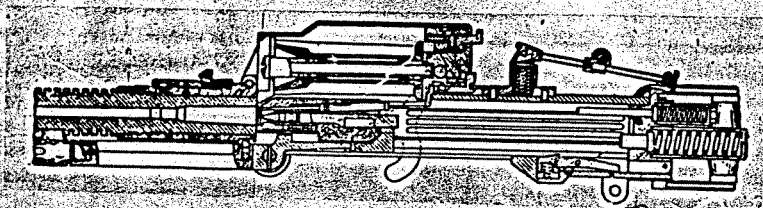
Parts and mechanisms of the machine gun in the forward position
